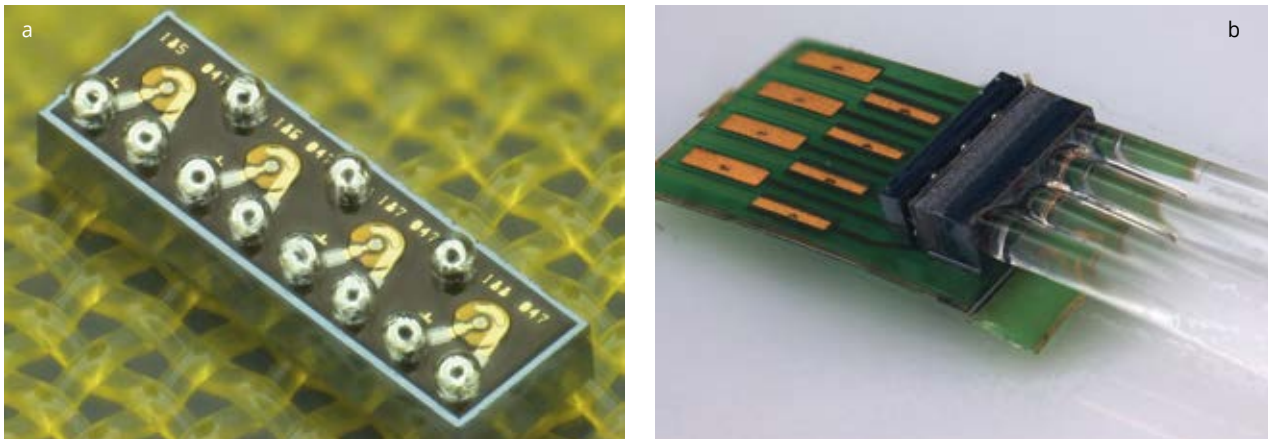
Four-fold VCSEL a) as a bare chip package with re-flowed solder balls and b) 1×4 version of an ODLM with VCSEL interfaced to four fibers and electrically connected to a flexible PCB board using the MEMS interposer
